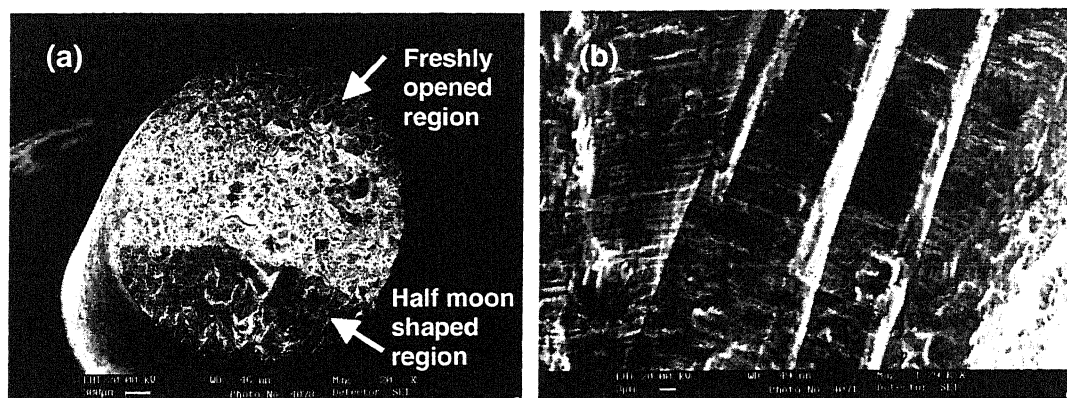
(a) Fracture surface of a typical pin and (b) scanning electron fractograph showing fatigue striations
